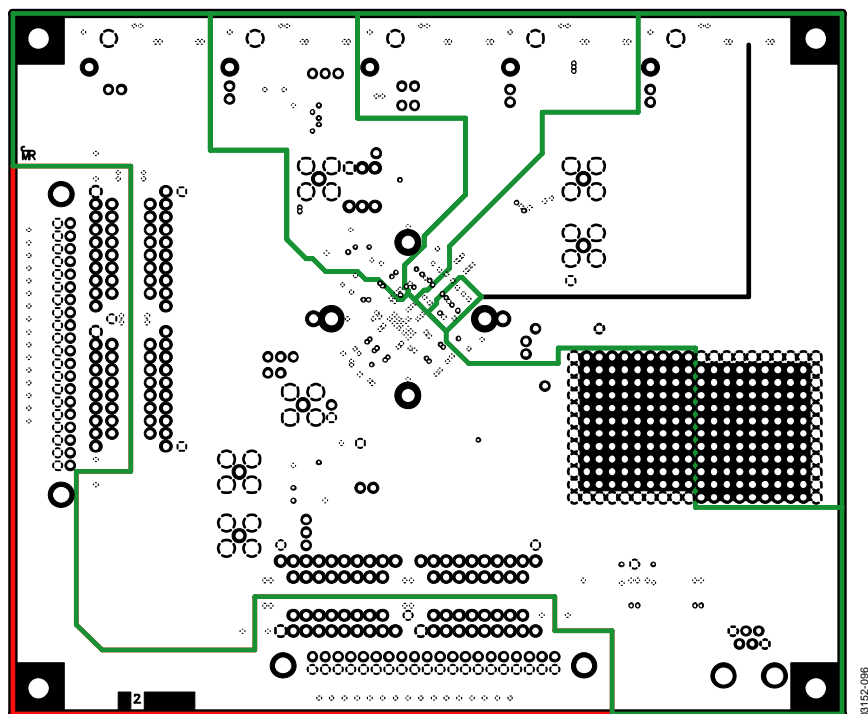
PCB Assembly, Layer 2 Metal (Ground Plane), Rev. F Evaluation Board
